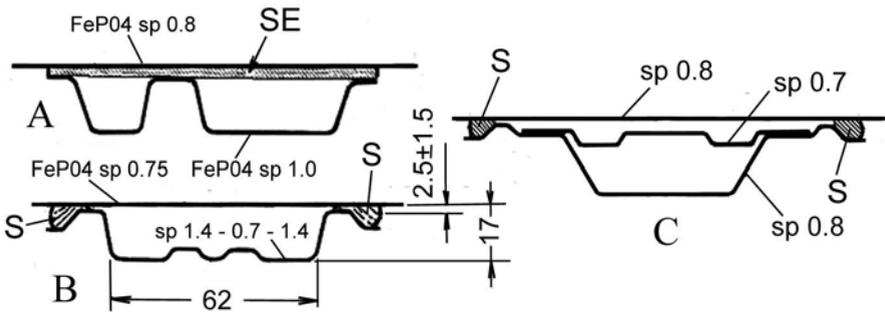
Some examples of roof bows: A) open section, uniform thickness; SE: thermo-expandable sealant strips; B) open section, tailored blank; S: extruded sealant; C) boxed bow; S: extruded sealant.
